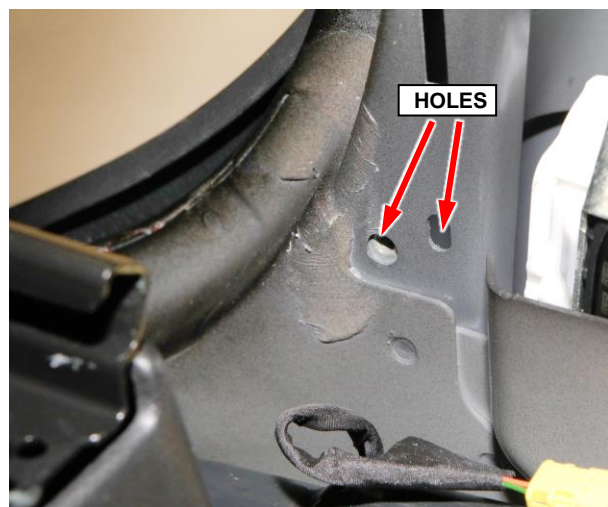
Sensor Anti-rotation tab and Bolt Holes
